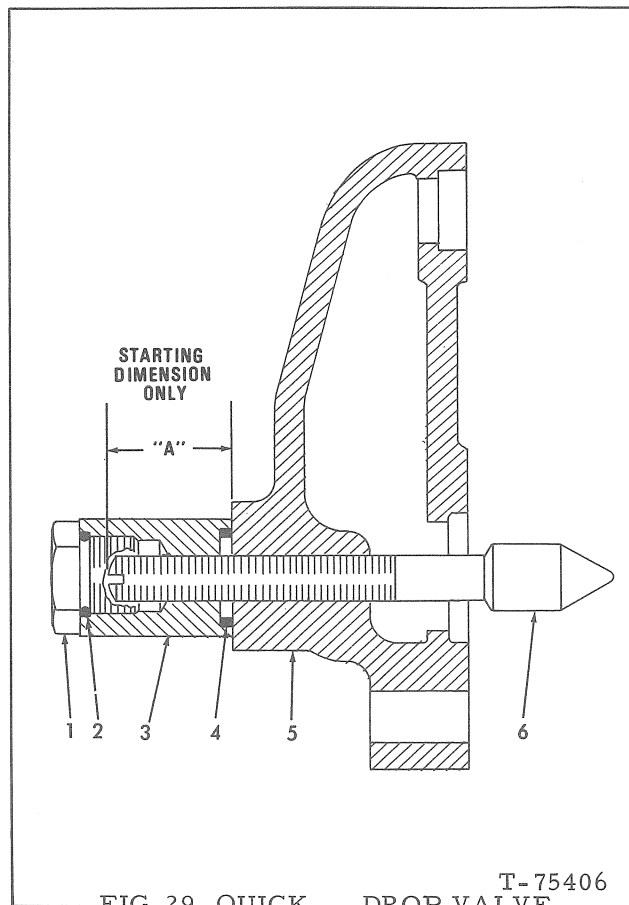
QUICK -- DROP VALVE ADJUSTMENT
